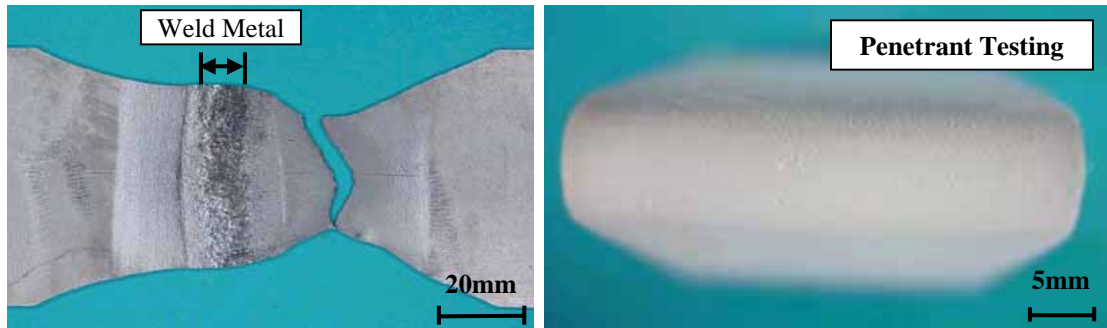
Appearances of Tensile Test Piece and Face Bend Test Piece of Welded Joint (ERTi-1)
